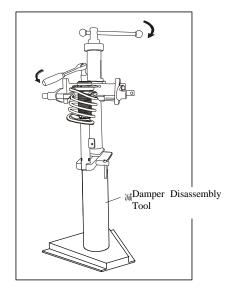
Disassembly and Assembly of Front Suspension Damper
